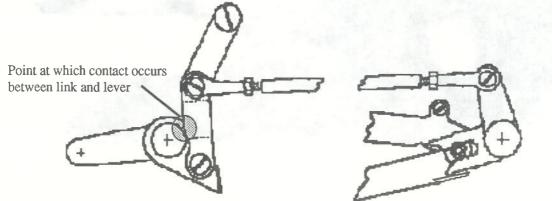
Gear nearly up - doors nearly closed Point at which door mechanism becomes stiff
